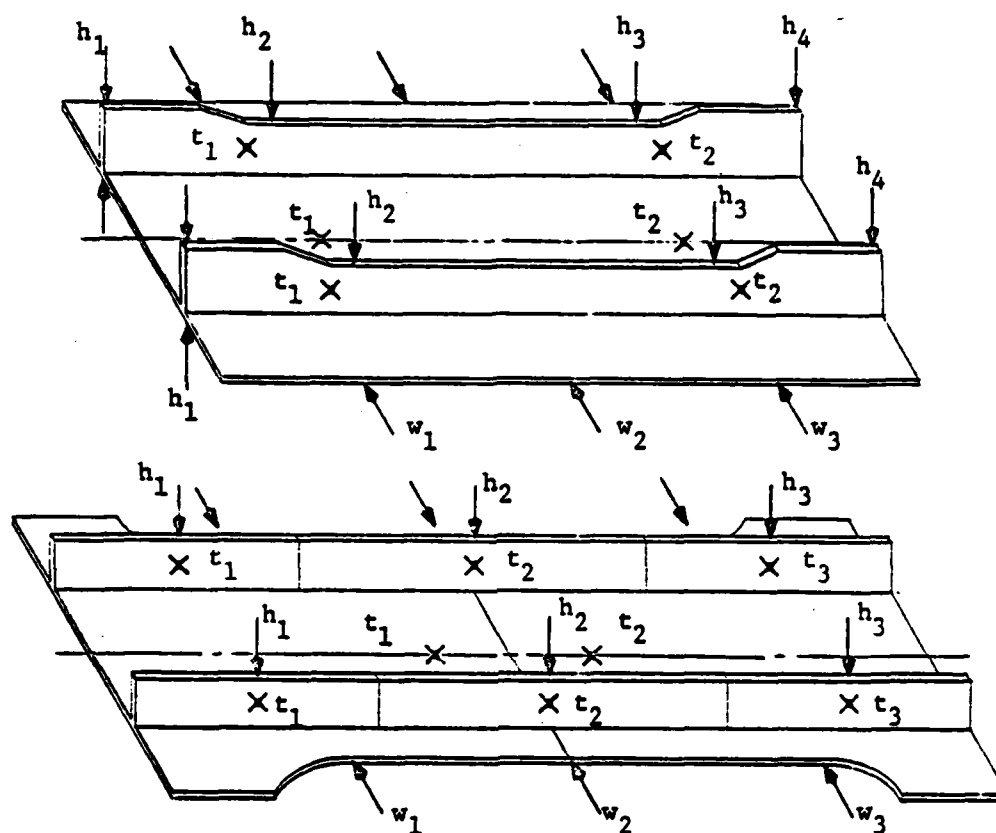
(780489-3) Typical Flatbar Stiffened Panel Weld Assemblies for Compression Test Specimens.
